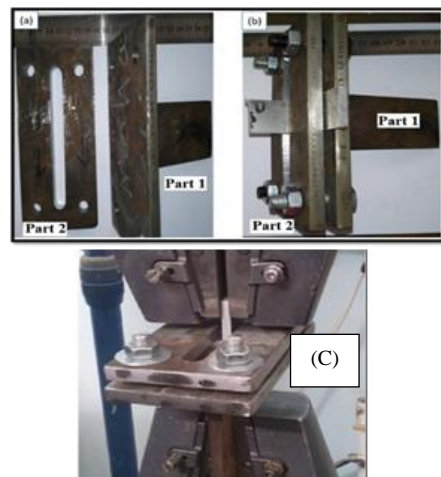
(a) and (b) photographs of clamping device for the tensile test without and with specimen, respectively; (c) a photograph of the clamping device attached to the tensile machine
